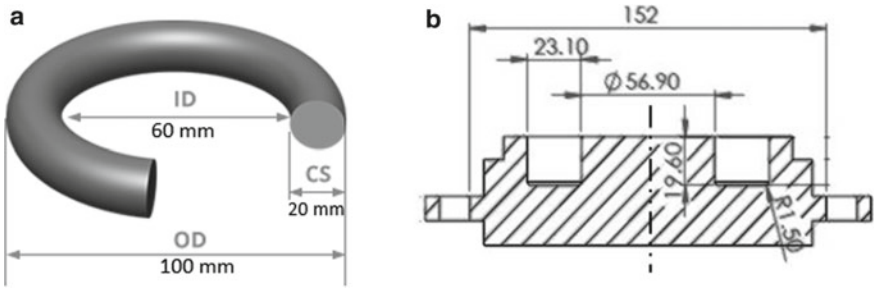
a O-ring cut-section, b Cross-section of bottom fixture
